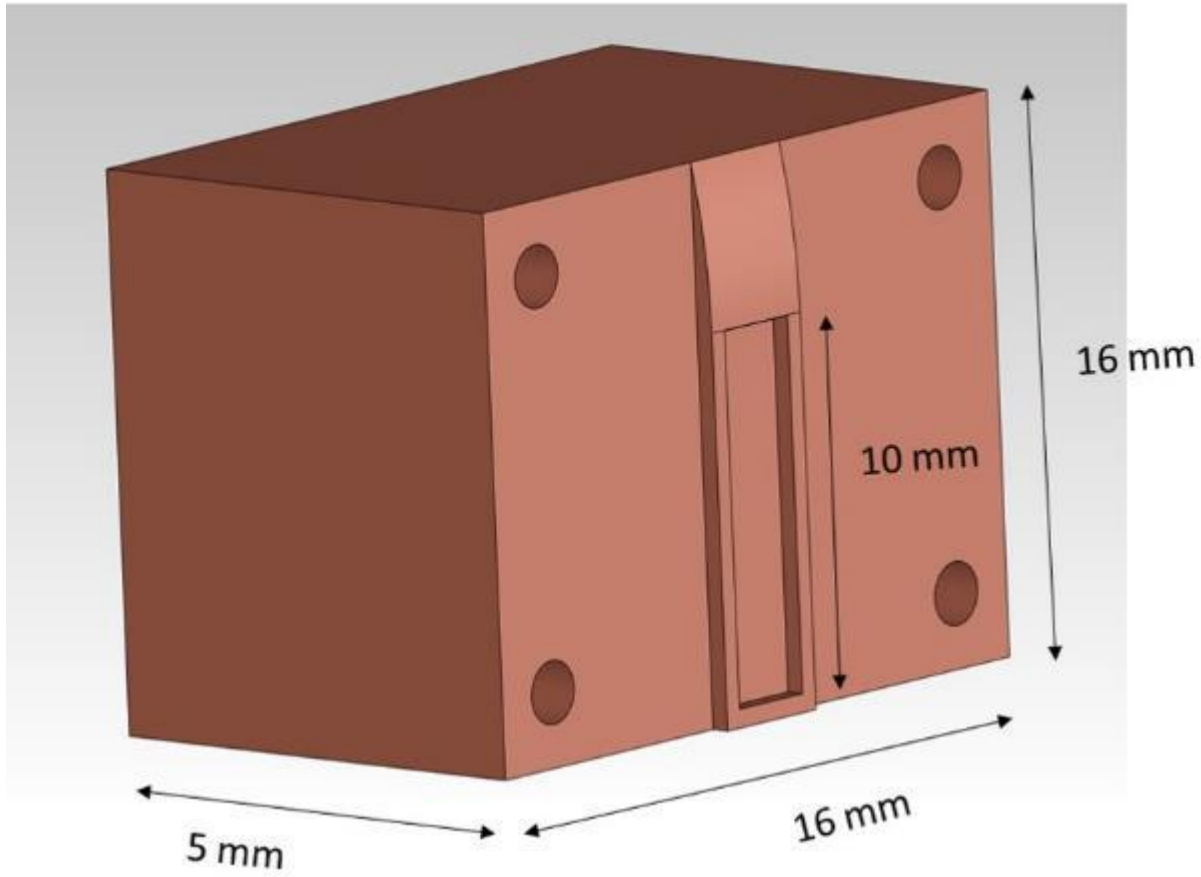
Drawing of the shim block showing critical dimensions to ensure thermal contact between the heat sink and the irradiated sample.
